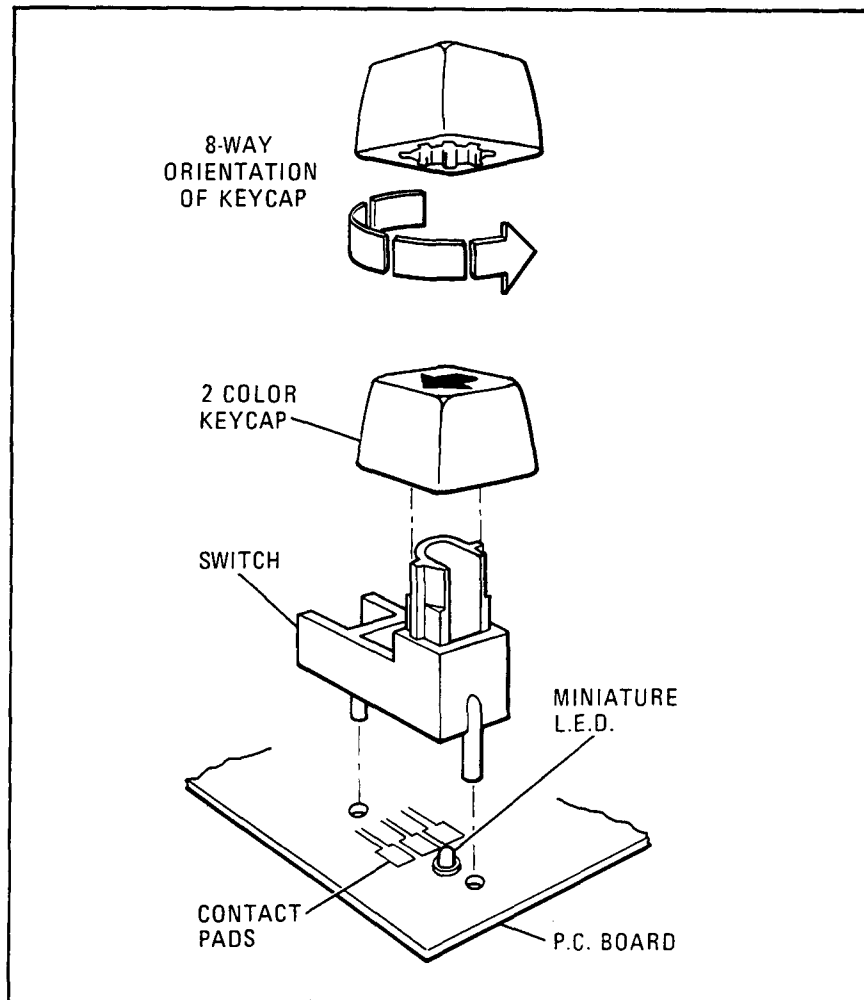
F-1. Front-Panel Pushbutton Key Assembly
